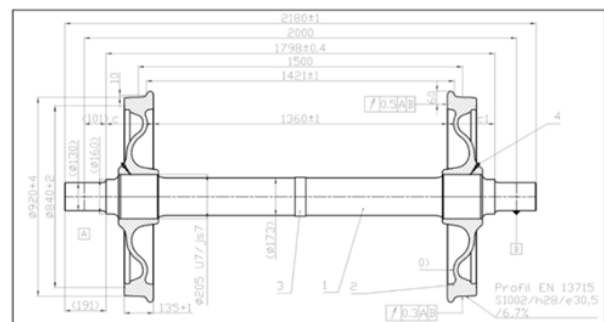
Wheel Rail Assembly for Broad Gauge Rail
